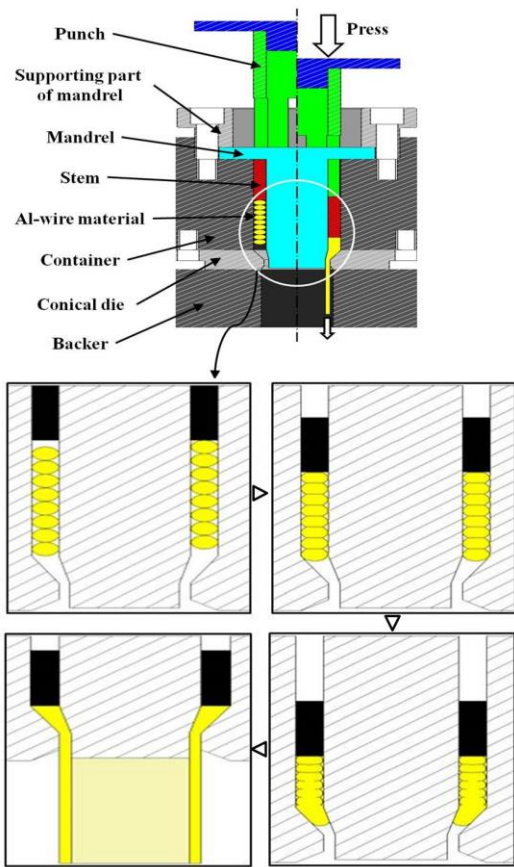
Extrusion die assembly and process step of welding concurrent extrusion forming process
